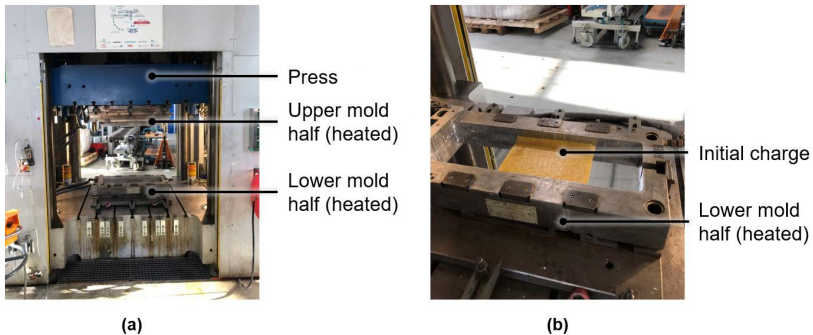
(a) Heated mold halves mounted on the press (b) initial charge placed in the lower mold half
